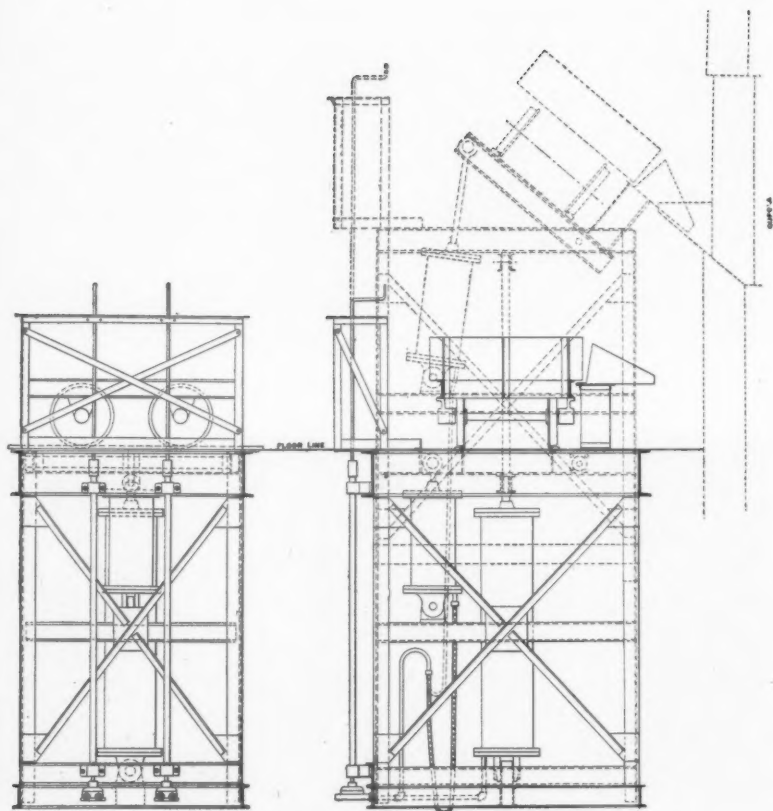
COMPOUND PNEUMATIC CHARGING MACHINE.
